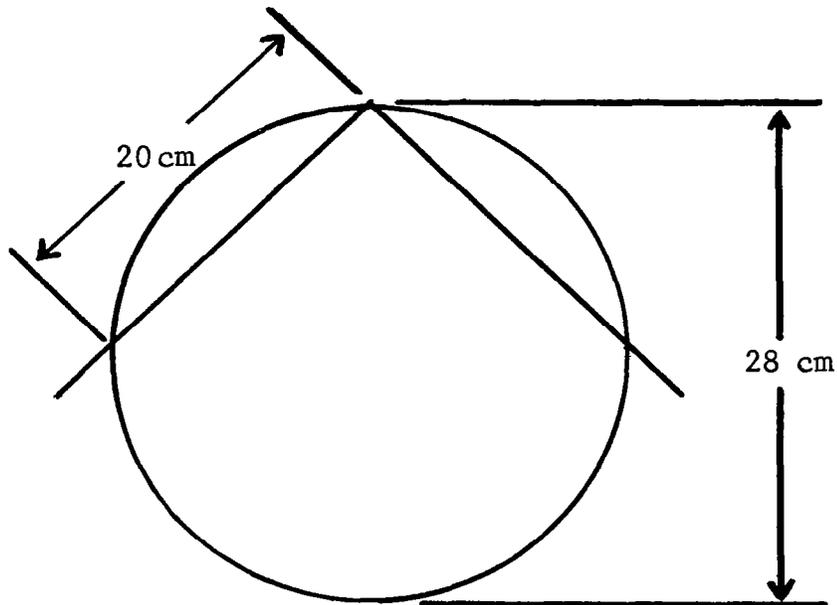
Dimensions of the Tape Orientation Test Fixture
